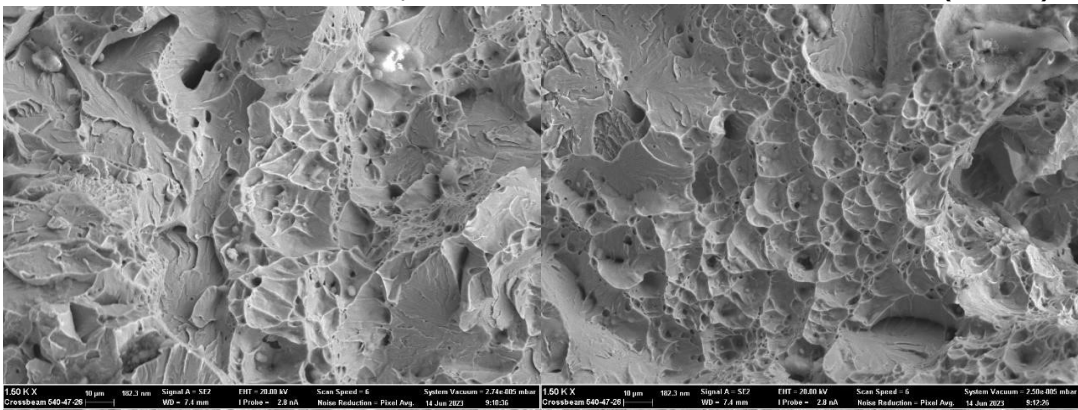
TR Driveshaft Yoke failure (Digital)
